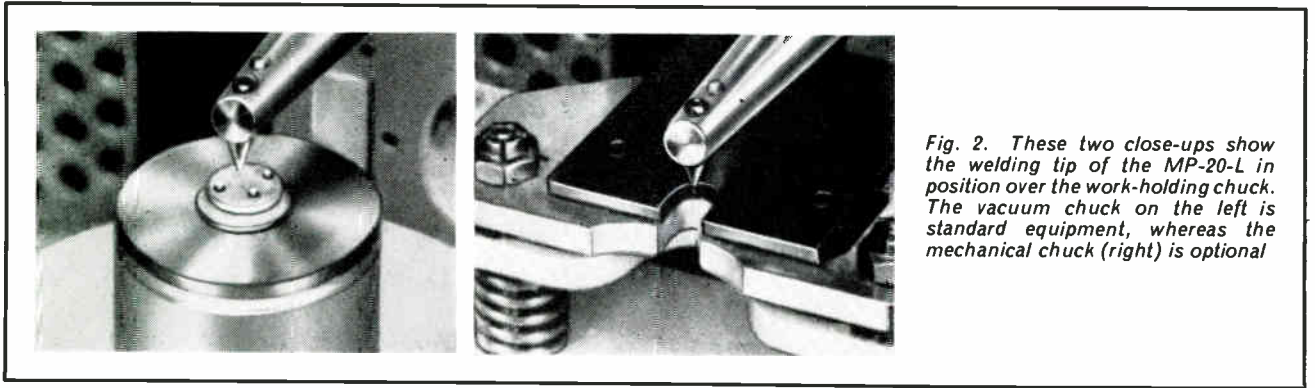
These two close-ups show the welding tip of the MP-20-L in position over the work-holding chuck. The vacuum chuck on the left is standard equipment, whereas the mechanical chuck (right) is optional
